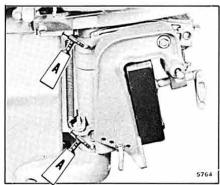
Swivel Bracket Fittings and Reverse Lock
